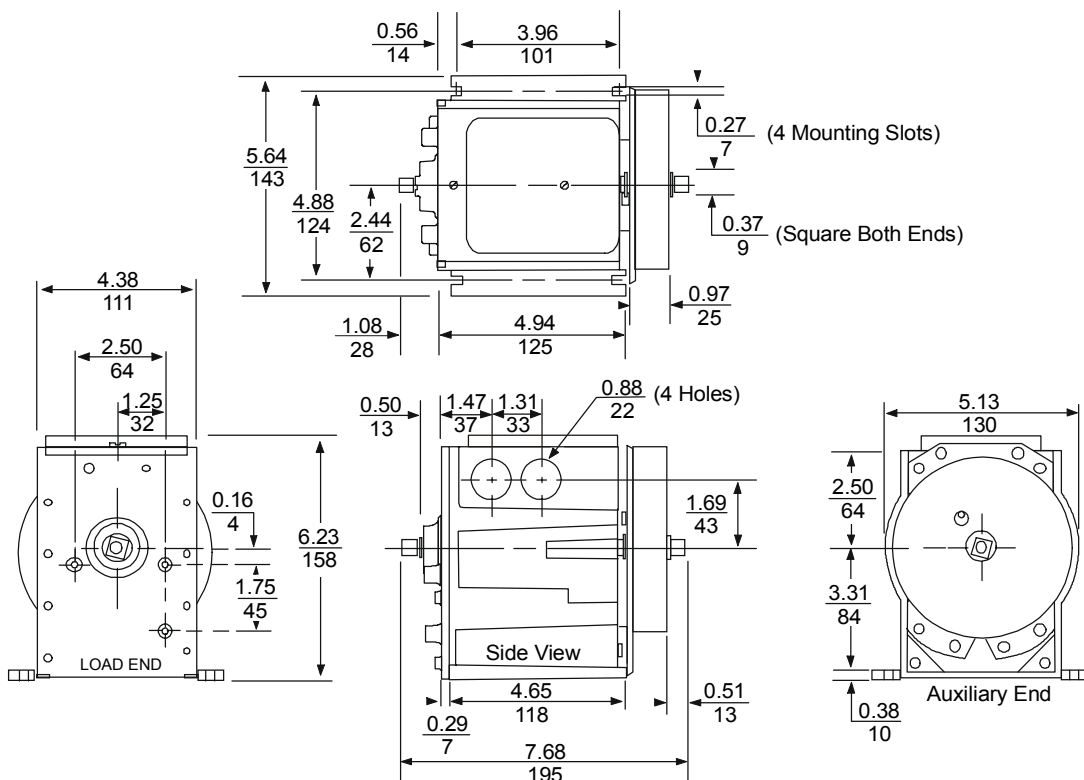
M100C with Spring Return Dimensions, in. (mm)
